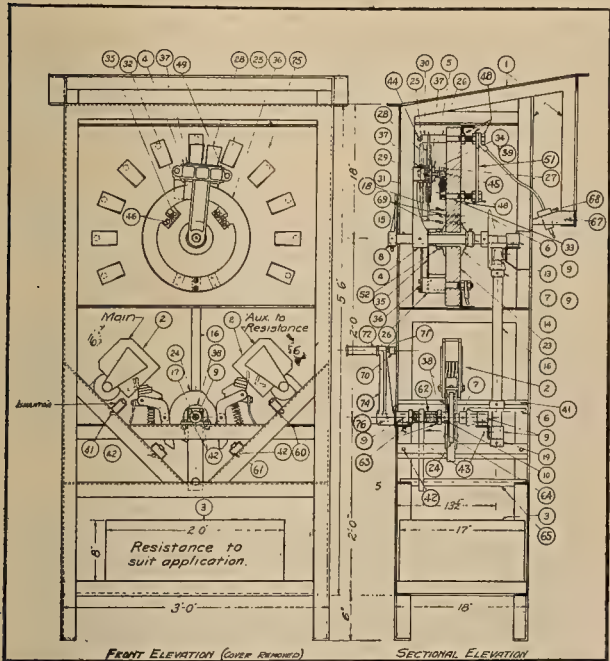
Front and sectional elevation of regulator head and frame. Front elevation shows appearance with cover removed. When cover is in place contact position is indicated by a pointer arm.
